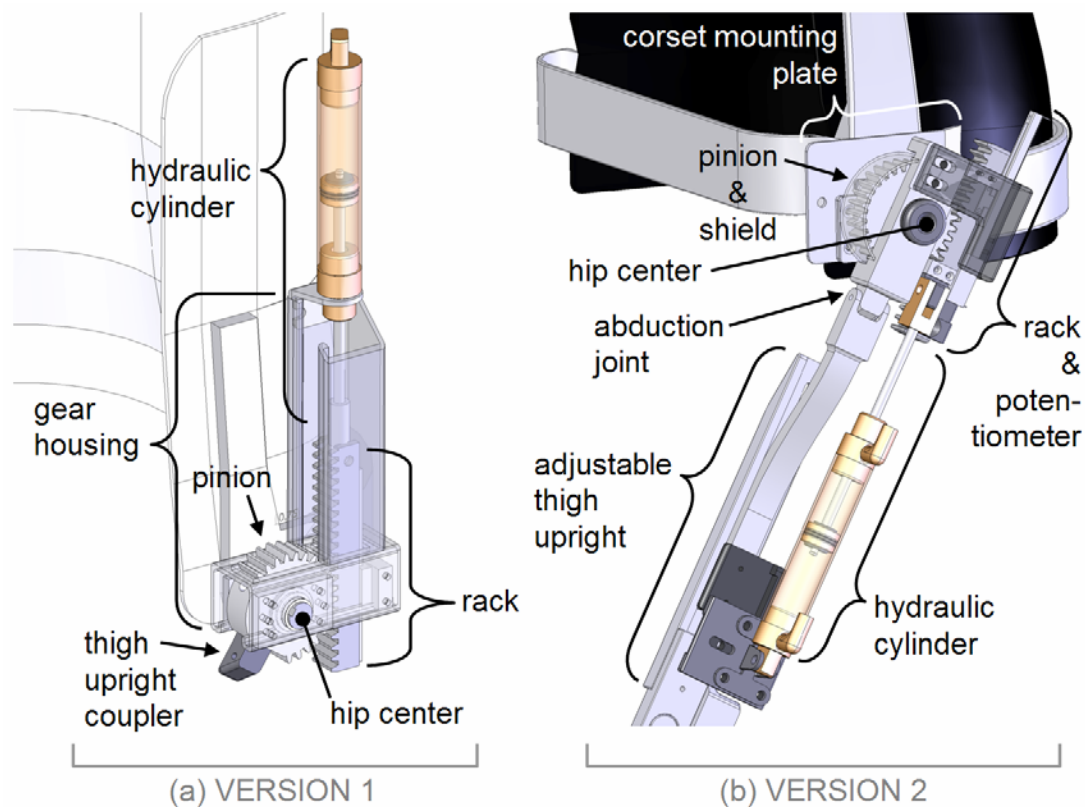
(a) Version 1 and (b) version 2 of the hydraulic rotary actuator for the VCHM.
